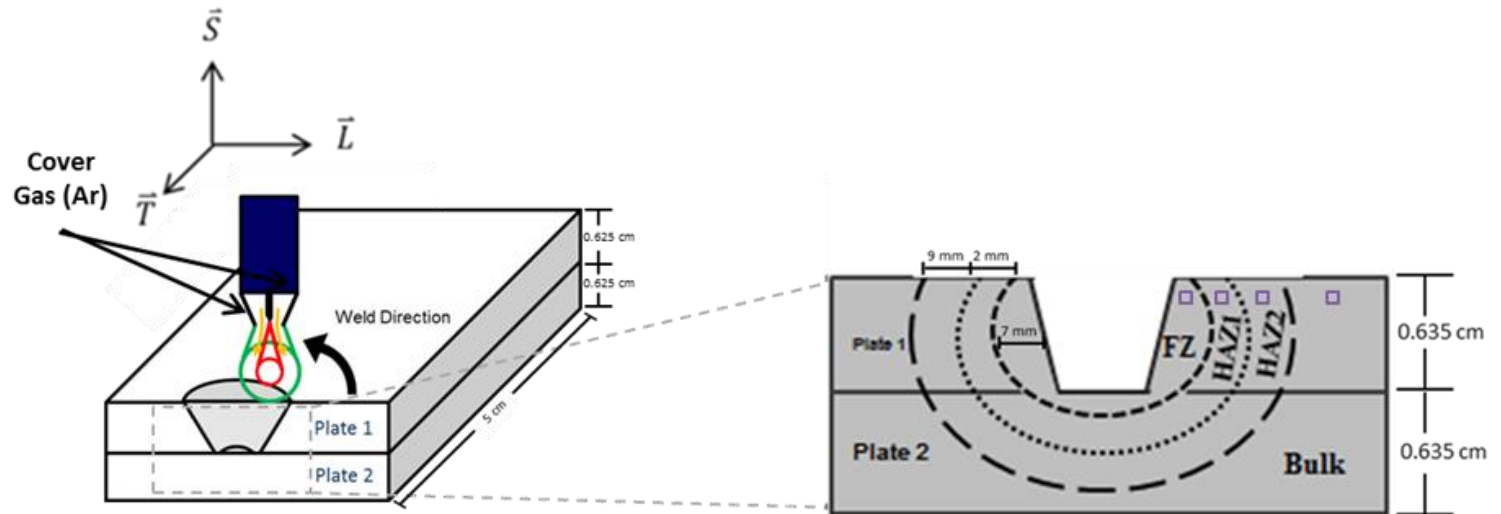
1. Schematic of TIG welding process and a schematic of weld zones, specifying the FZ and HAZs. Far enough away from the weld zone, the sample will become unaffected base material. All samples were welded through a 45° countersunk hole in order to have full penetration through both plates. The area of the isolated weld zone test locations is marked.
